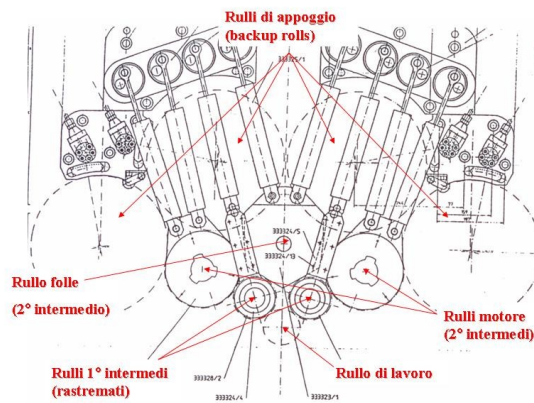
"20 Hi" Sendzimir cold rolling mill scheme - upper half (rolls)
